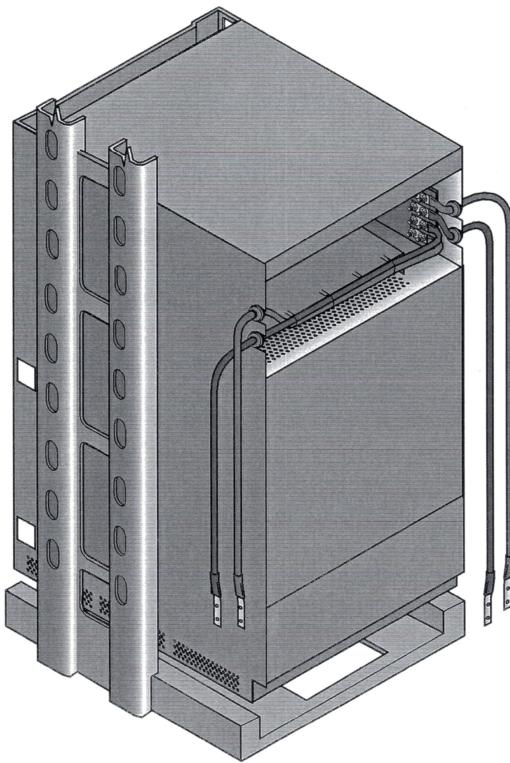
X3 Fabric Shelf with Power and Return Cables Connected (Rear view)
